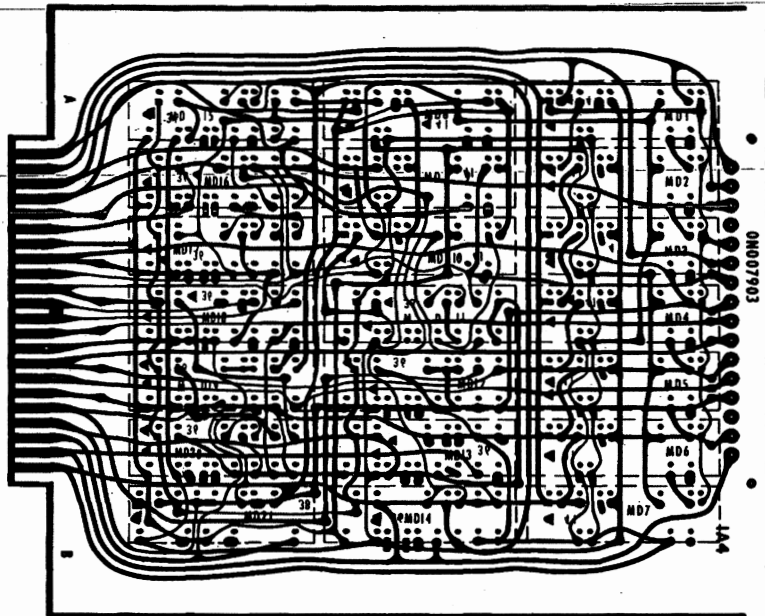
Card E-AJL Printed-Circuit Layout.
